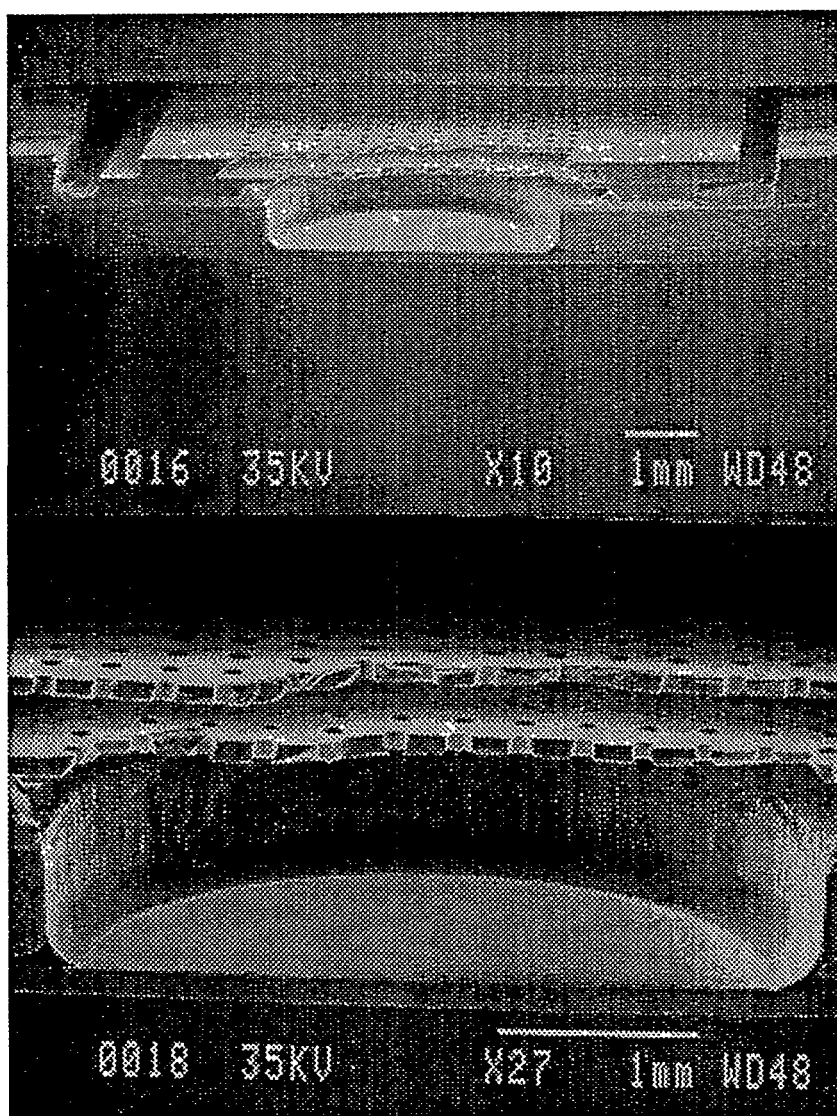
Cross-sectional photographs of assembled stacked pumps.
